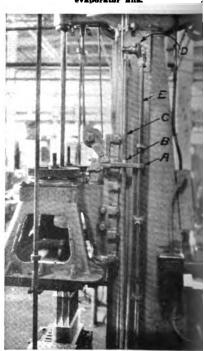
Assembling the fins to the tubes of an evaporator unit. The press was rebuilt by Servel from a multiple drilling machine.
